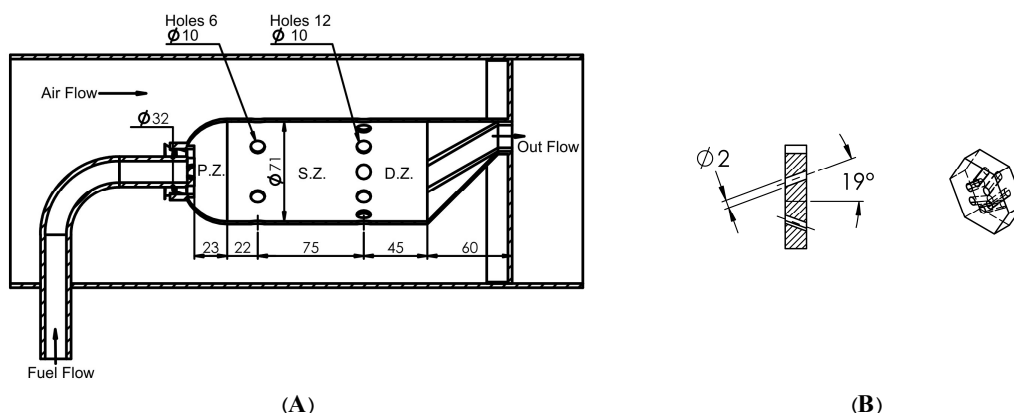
(A) Combustion Chamber (B) Fuel Injector of Combustion Laboratory Testbed of Amirkabir University of Technology
